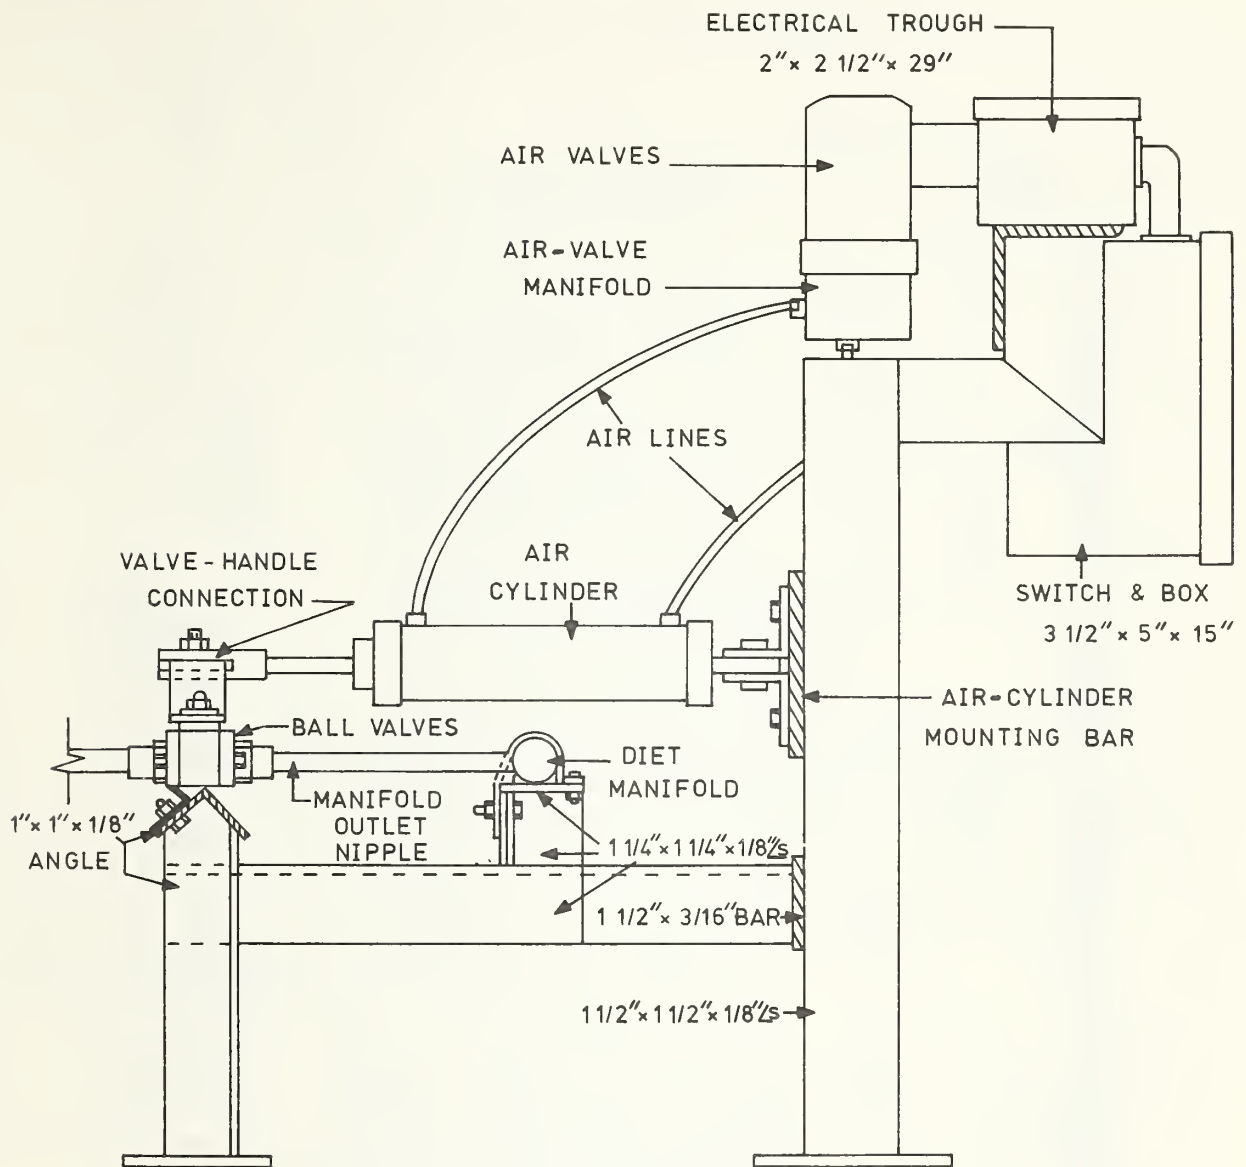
Schematic diagram showing end view of valve-actuator system.
